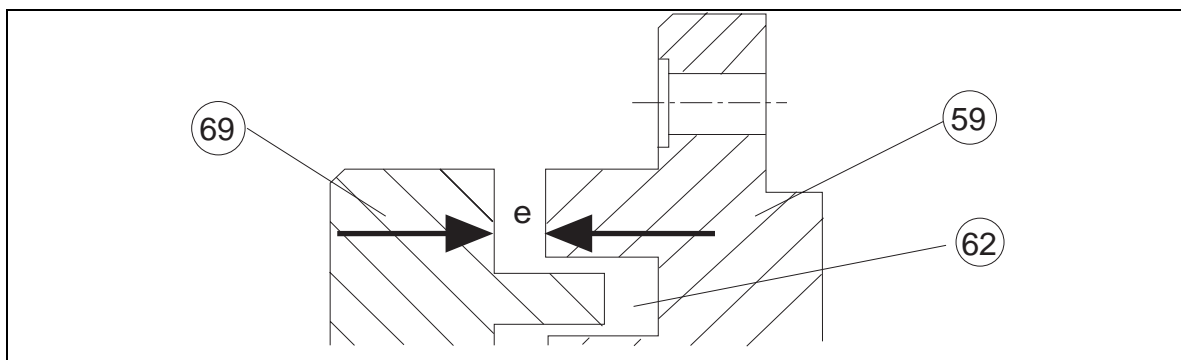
Clearance between dust flinger and rigid labyrinth seal
